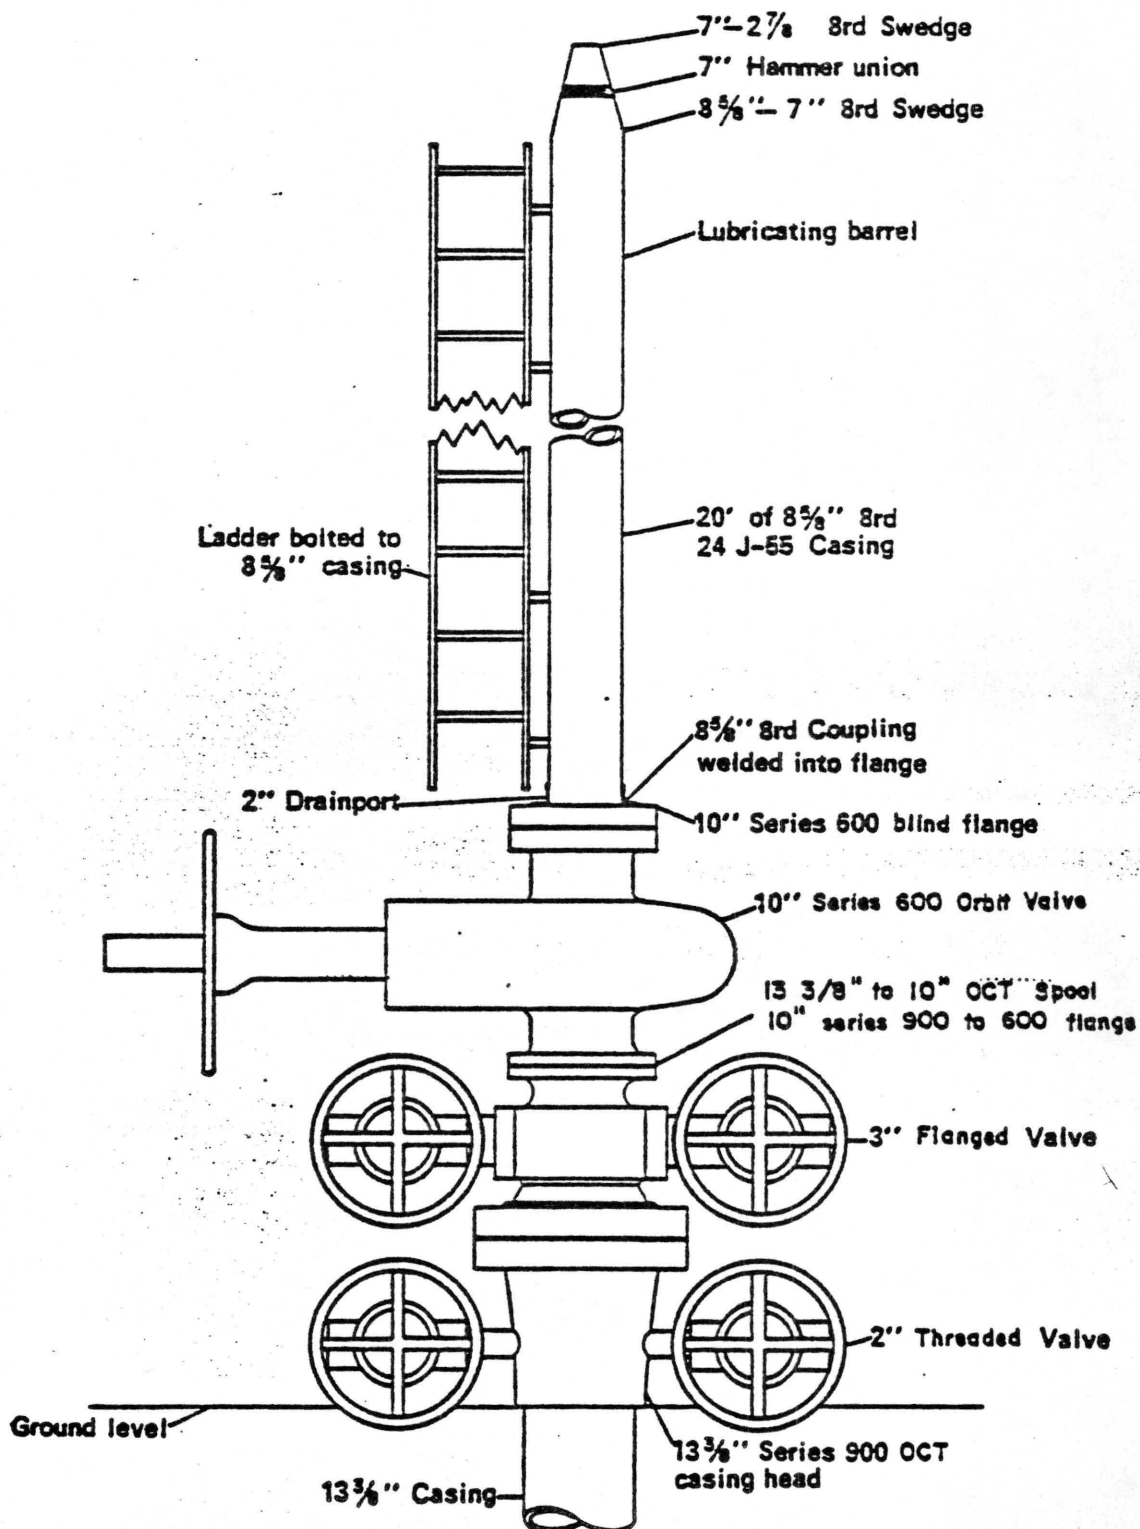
Well-head equipment of Madison test well 2, with lubricating barrel attached.
